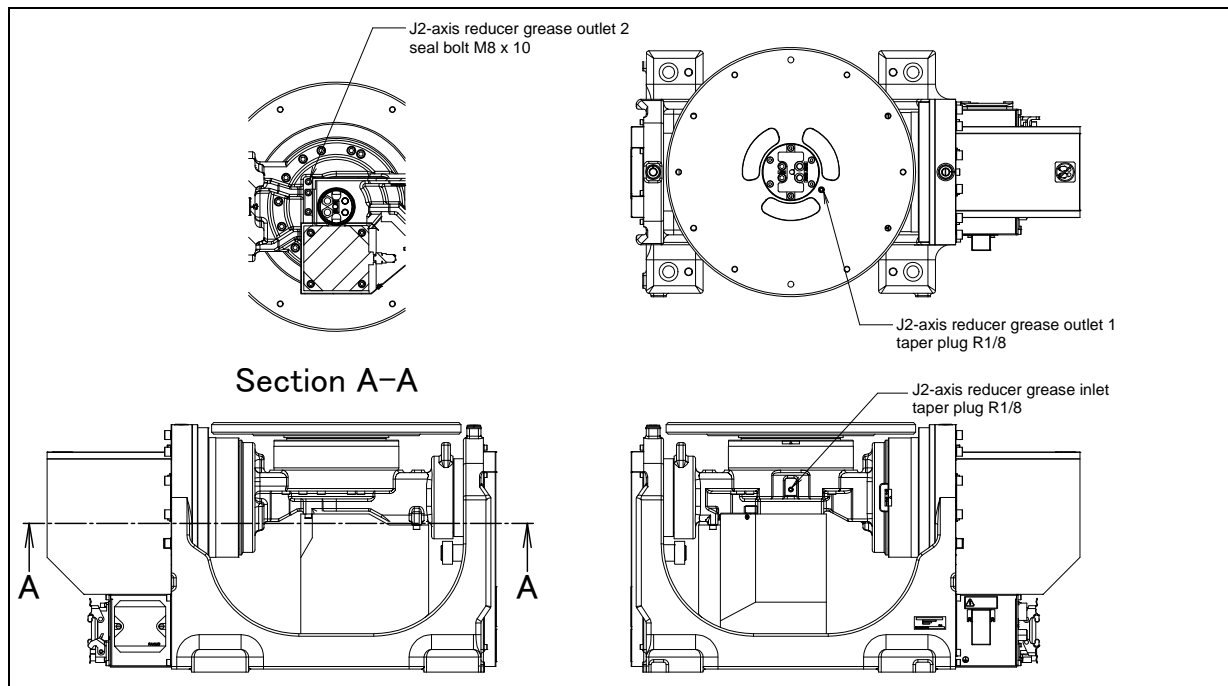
(b) Grease inlet and outlet of the J2-axis reducer
